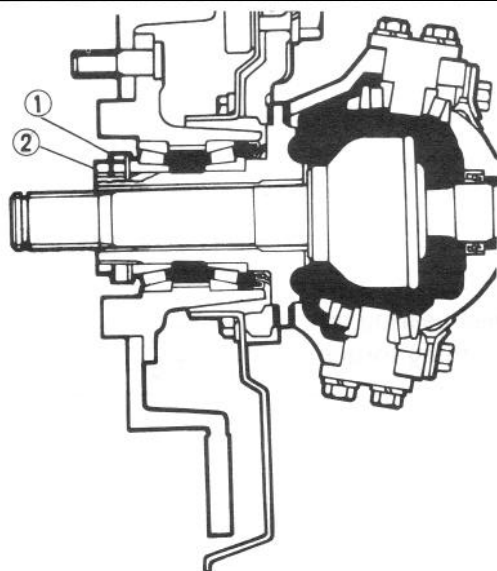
(A) Special tool (Front Wheel Bearing nut socket wrench 09941-58010 )
